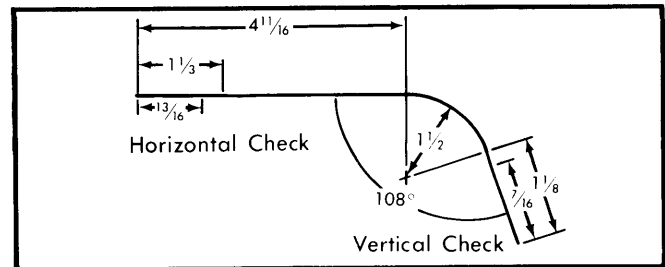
Dimensions for Locally Made York Compressor Oil Level Dipstick
